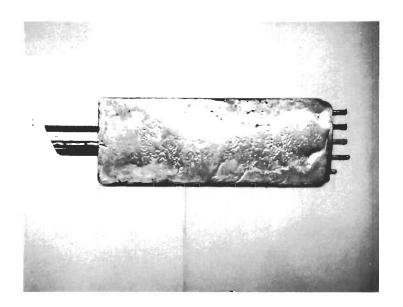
Surface on Flat Plate Casting Exposed to Thin Coating of Flux on Mold Surface
